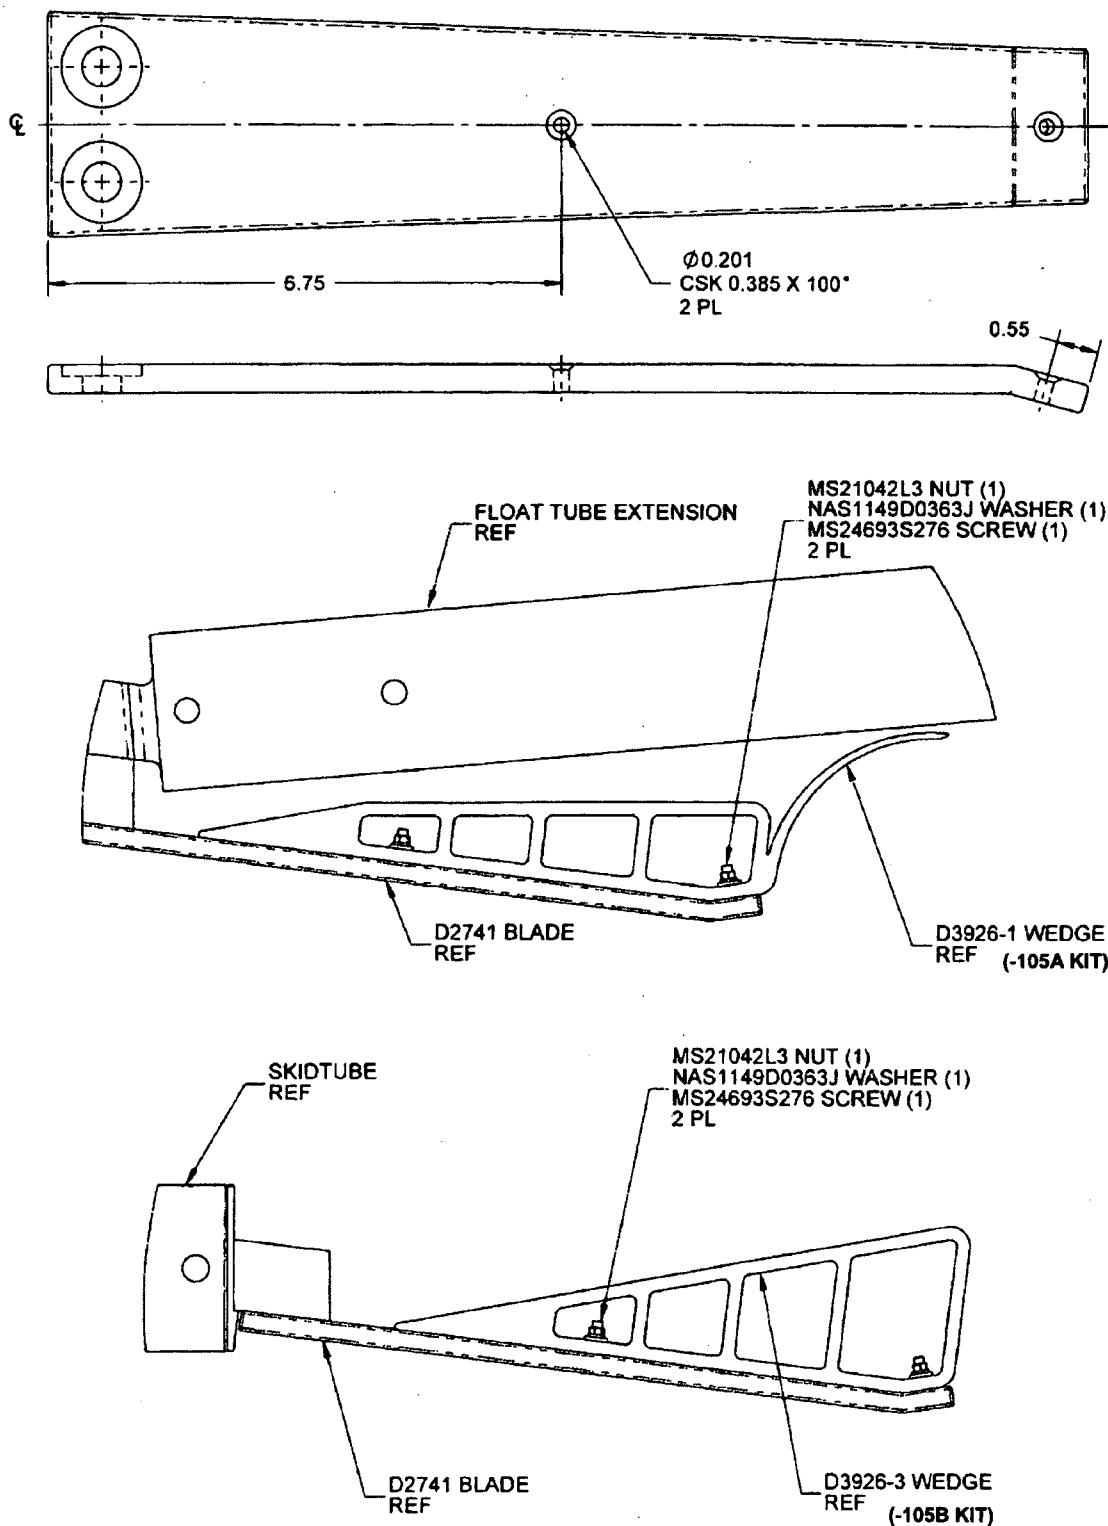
D350-636-105A/-105B WEDGE KIT INSTALLATION
